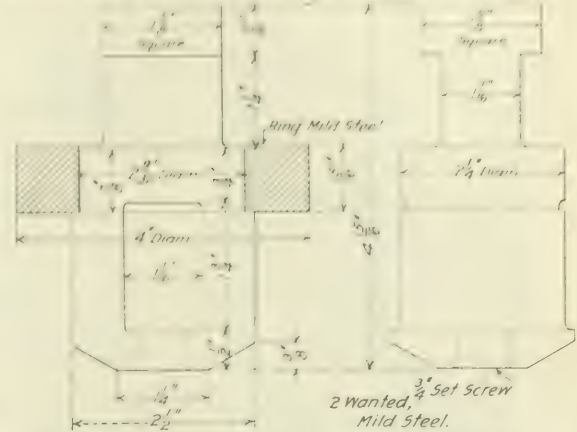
Special Tool Post Used on Slotter for Machining Engine Truck Pedestals.
